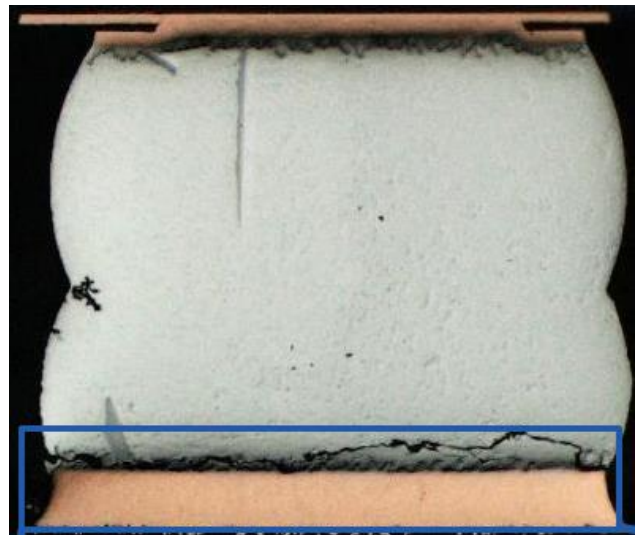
Leg 4 (5S mold + SAC405 ball) solder crack at PCB side.
